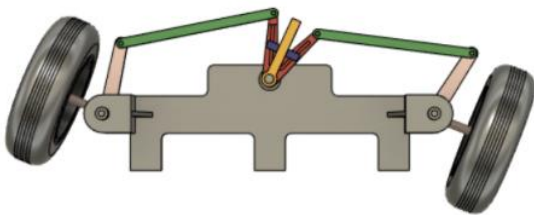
illustrates a top view of the toe adjustment mechanism depicting a given steering position with the wheel having a toe-out position
